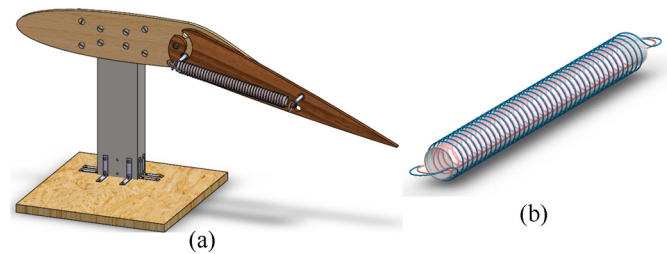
Design B: collinear actuator design: (a) flap model utilizing collinear actuators; and (b) the actuator itself.
